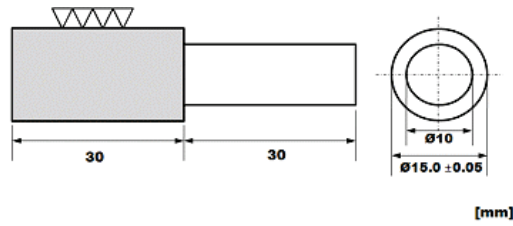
Dimension of Specimen for Rolling Contact Fatigue Test.
